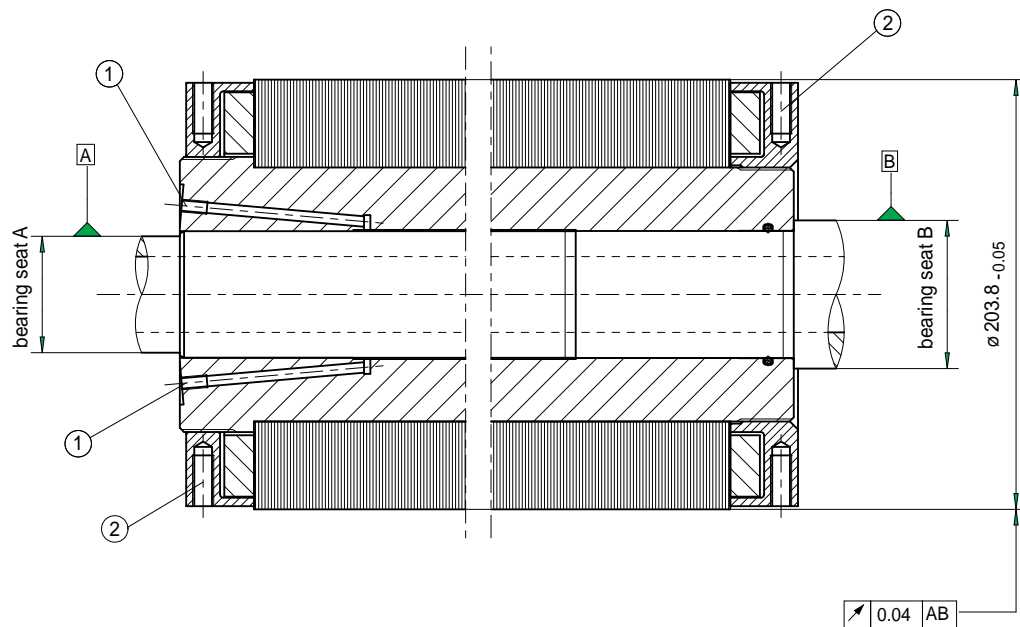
1MB 312 frameless spindle motor- dimensional data (part 2)
